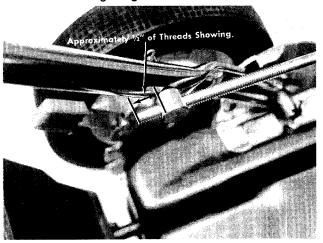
FIGURE D. CLUTCH ROD SETTING FOR THE FIRST AND SECOND HIGHEST CUTTING HEIGHT.
